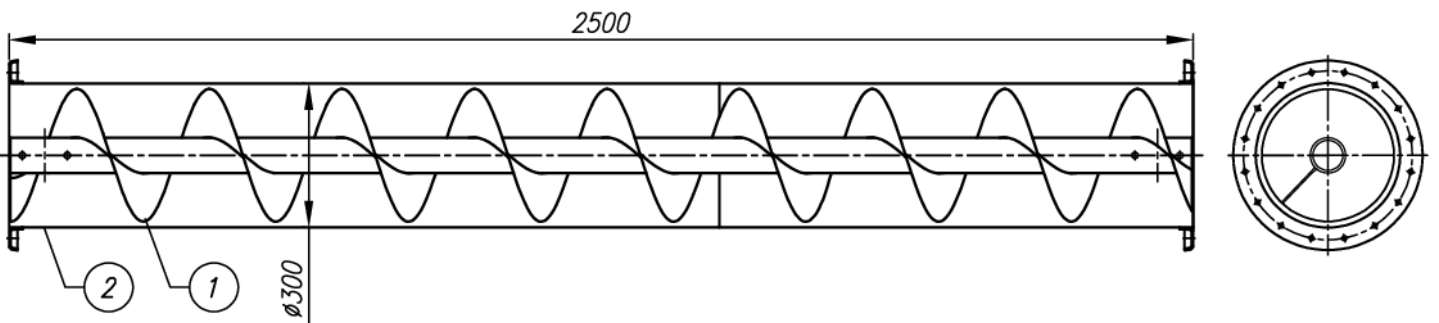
A 2.5 m long extension of the screw conveyor PS300 (PS300-P2.5)
